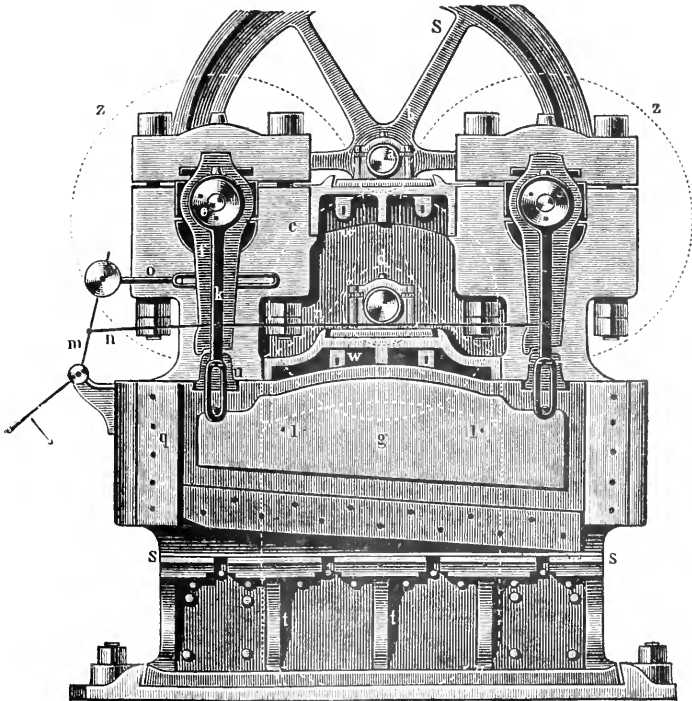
FRONT ELEVATION OF BOILER-PLATE SHEARS.
